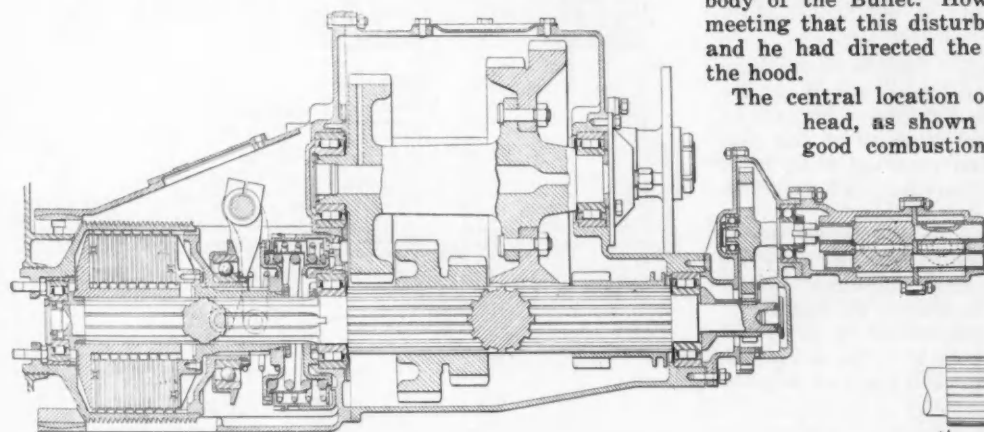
CLUTCH AND TRANSMISSION ASSEMBLY
